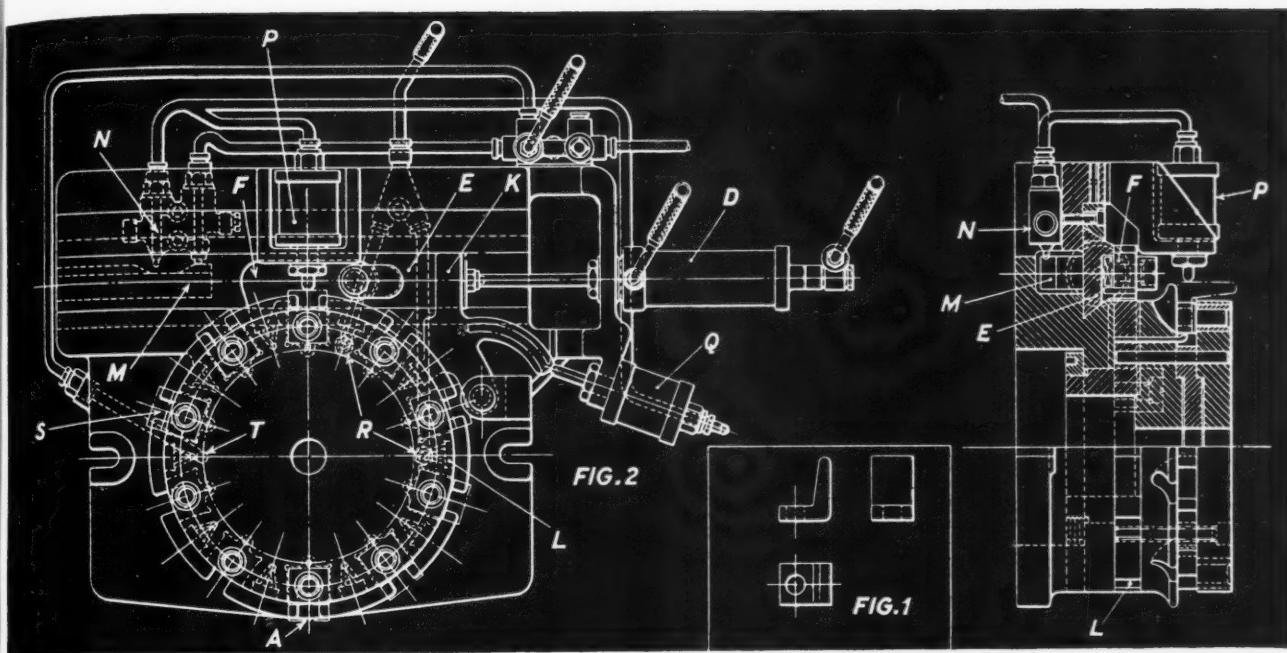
The hole in this copper contactor tip is drilled by means of the automatic jig shown in Fig. 2, which locates, clamps, indexes, and ejects the part. Fig. 2. Plan and sectional view of automatic drill jig with pneumatic indexing, clamping, and unloading features
